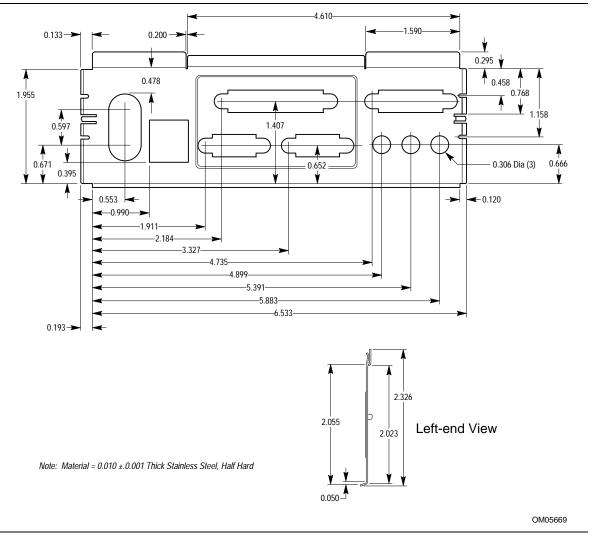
Back Panel I/O Shield Dimensions (ATX Chassis Dependent)
